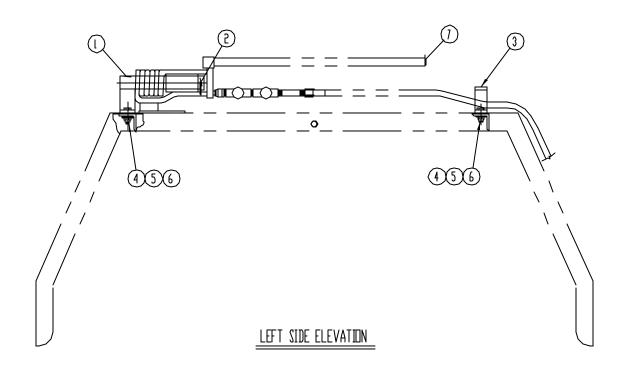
PORTABLE TORCH HOLDER ASSEMBLY, LPG
